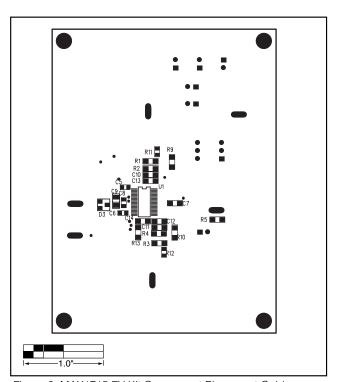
MAX1715 EV Kit Component Placement Guide—Solder Side
